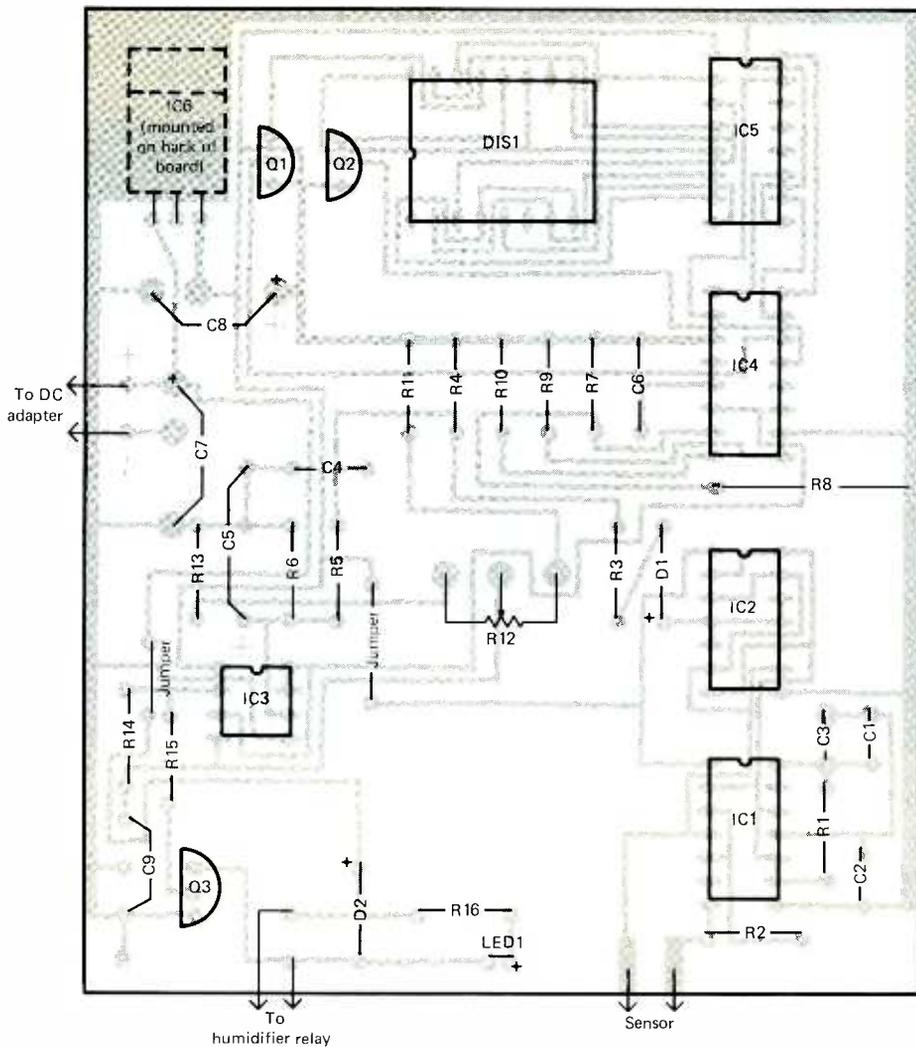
Component-placement guide for pc board. Note that components are shown from foil side of board. You must mount these components on the opposite side of the board.
